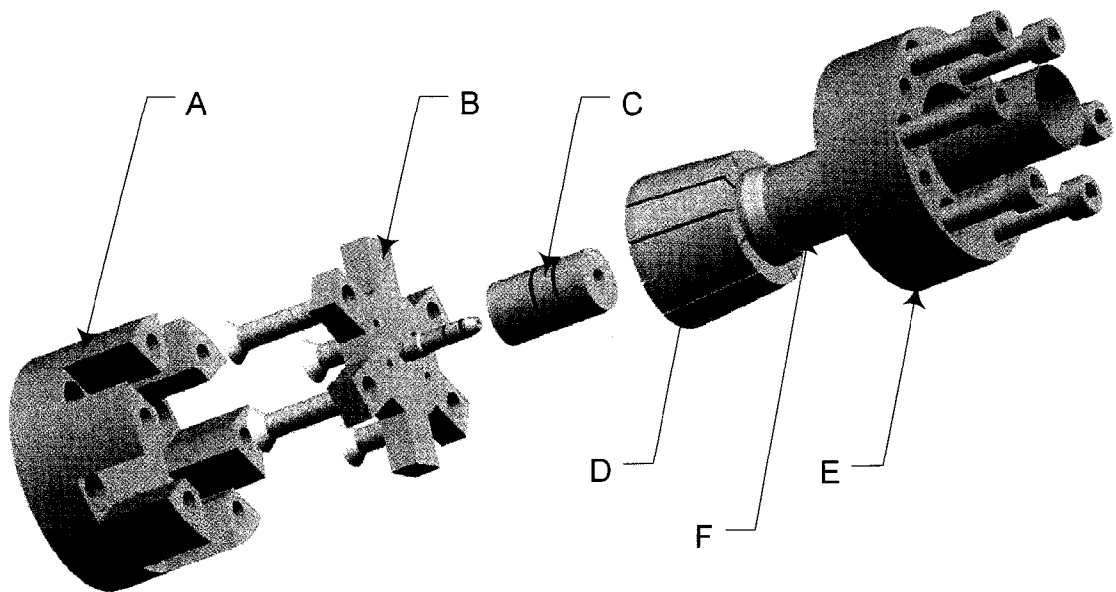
Schematic of grip assembly designed by the author for testing 50.8 mm internal diameter composite tubes. Parts are labelled as A) the crown which is bolted to the material testing system; B) spoked hub; C) end plug with o-rings; D) collet; E) the collar; and F) the specimen. (drawn by Andrew Ng)
